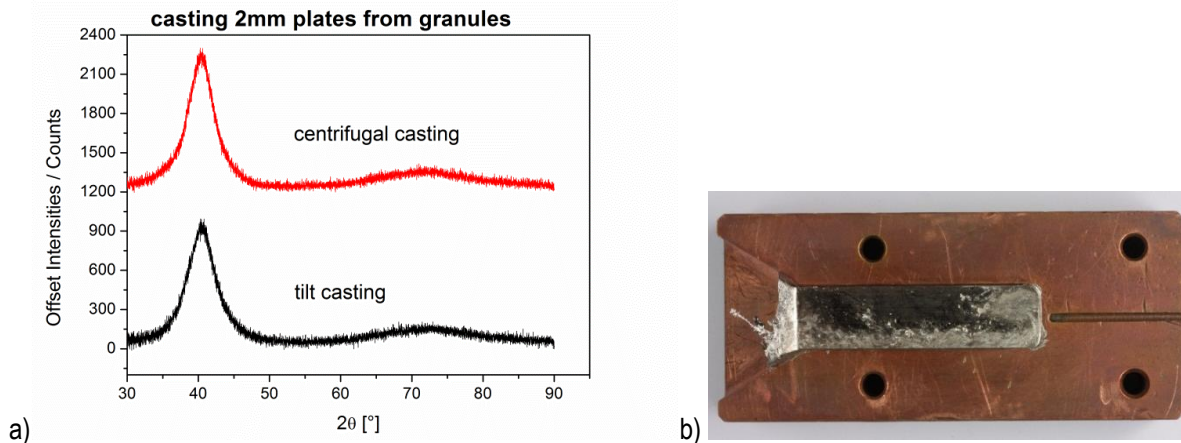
a) Xray diffractogram of cast plates after centrifugal casting and after tilt casting; b) 2mm thick plate
